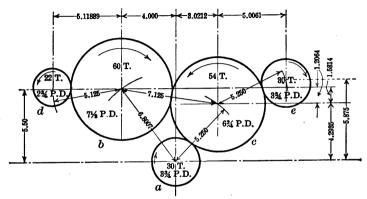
Camshaft and accessory drive of Class B, military truck engine.
